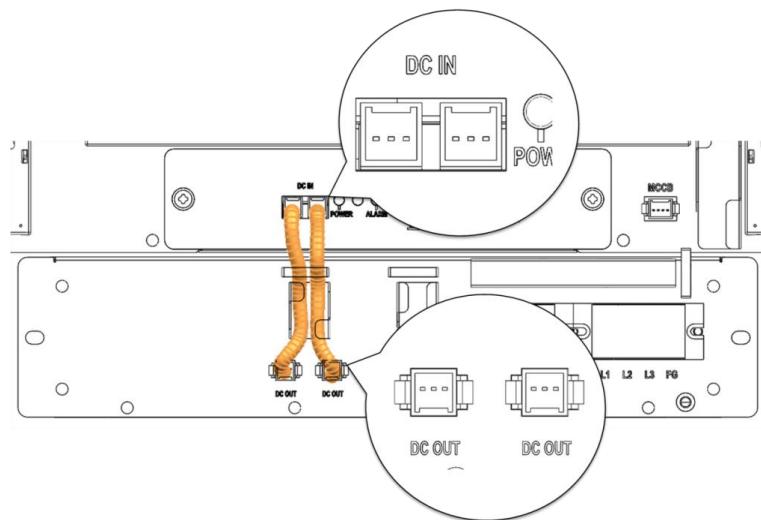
DC Power Cables from SMPS Assembly Type B to SMU
